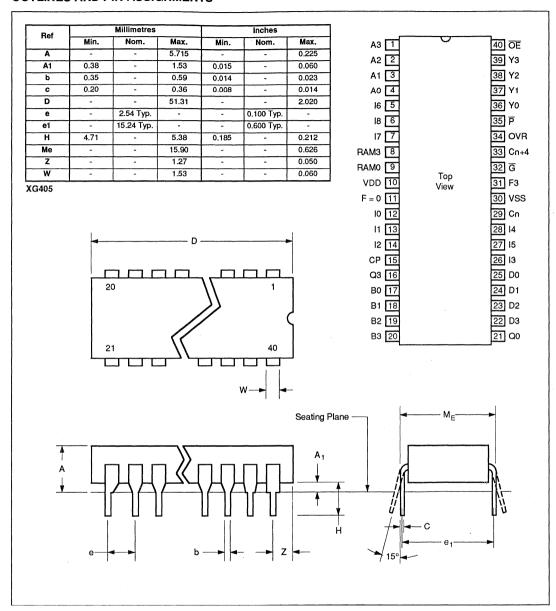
40-Lead Ceramic DIL (Solder Seal) - Package Style C
